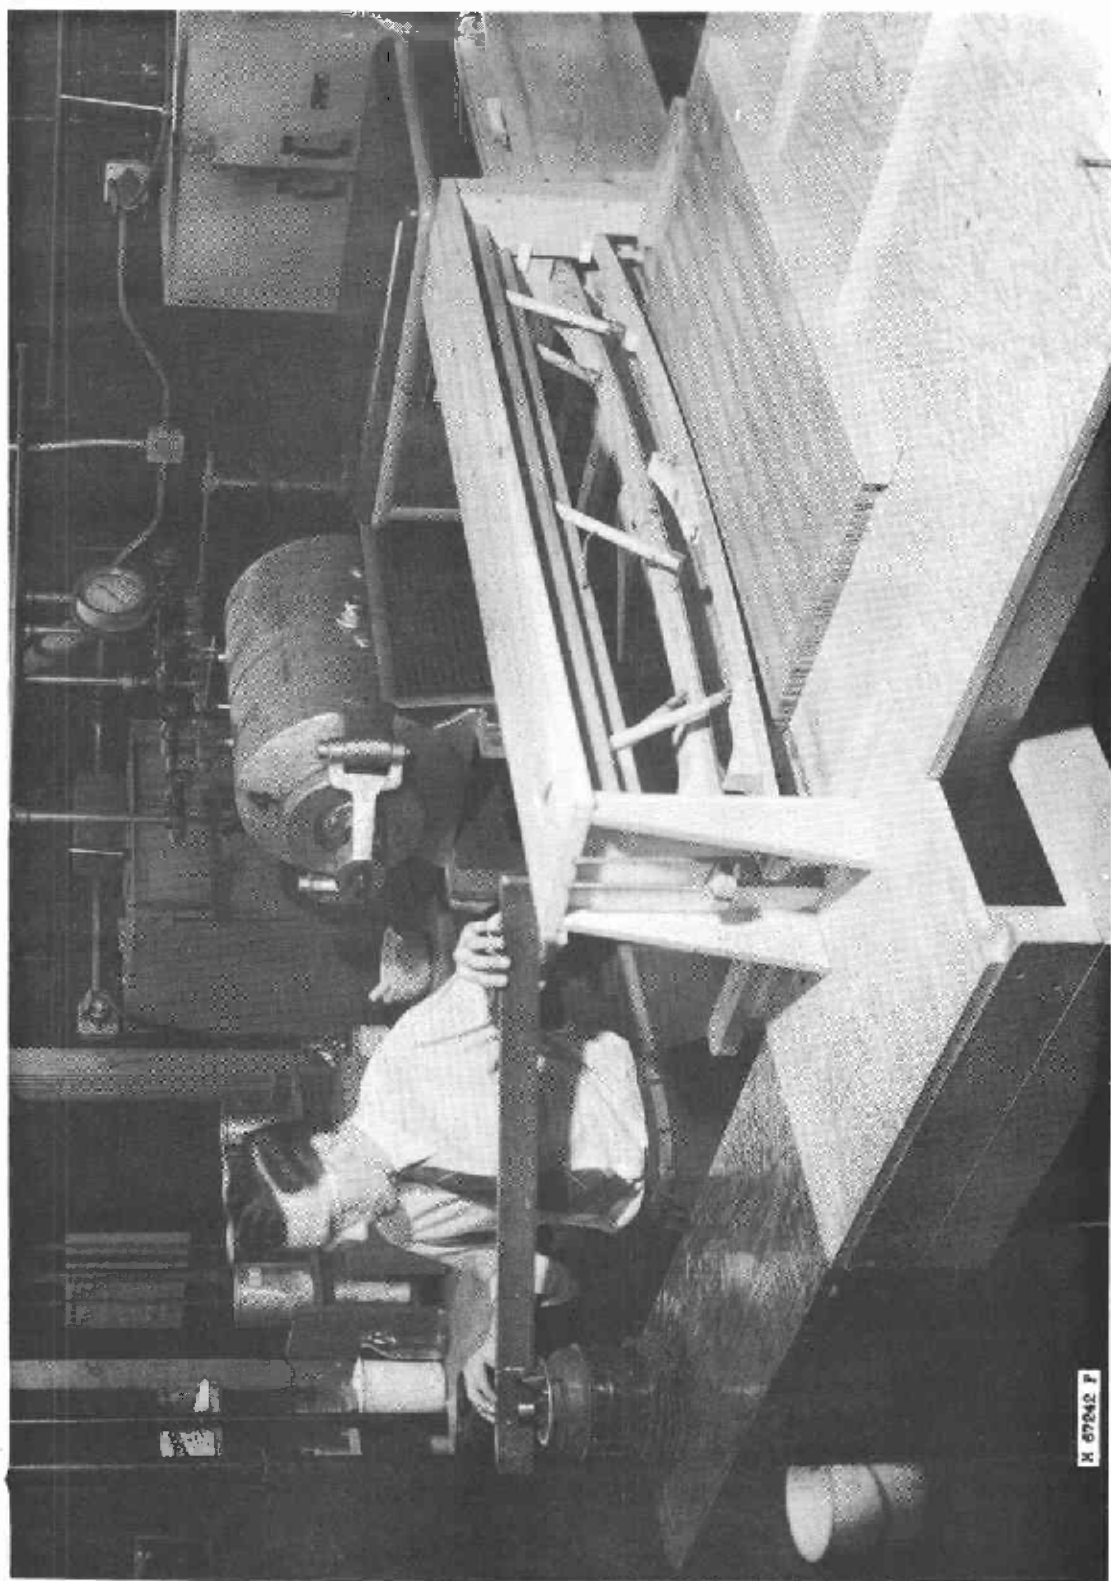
Applying the adhesives to the edge of a strip of paper honeycomb core.
